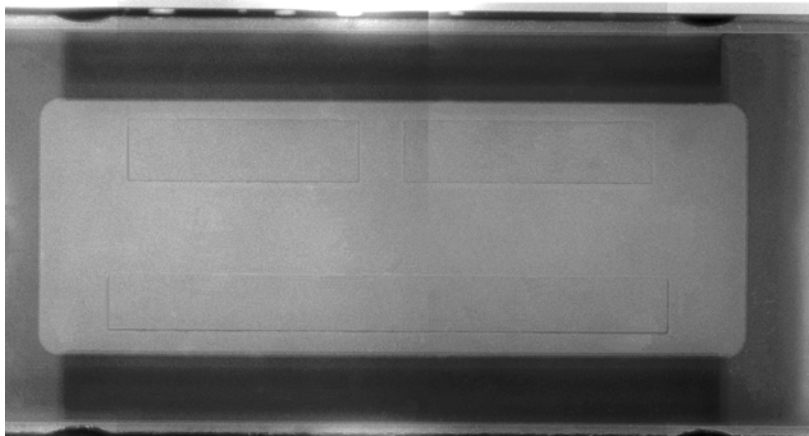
X-Ray Image Showing Voids in Solder Attach for NI-780 on a 0.162" (4.11 mm) Thick Copper Plate
